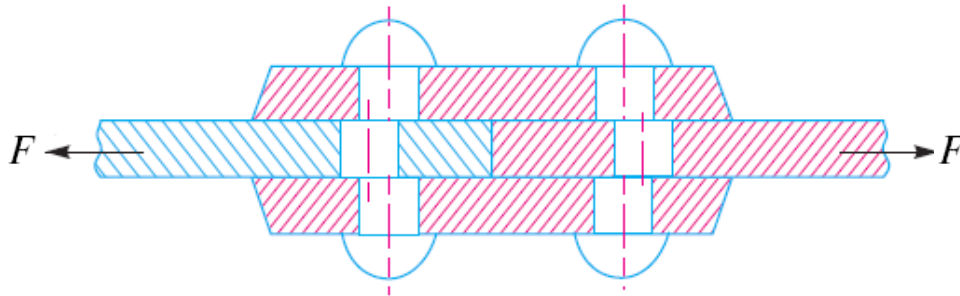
12). Shearing off a rivet in double cover butt joint.
